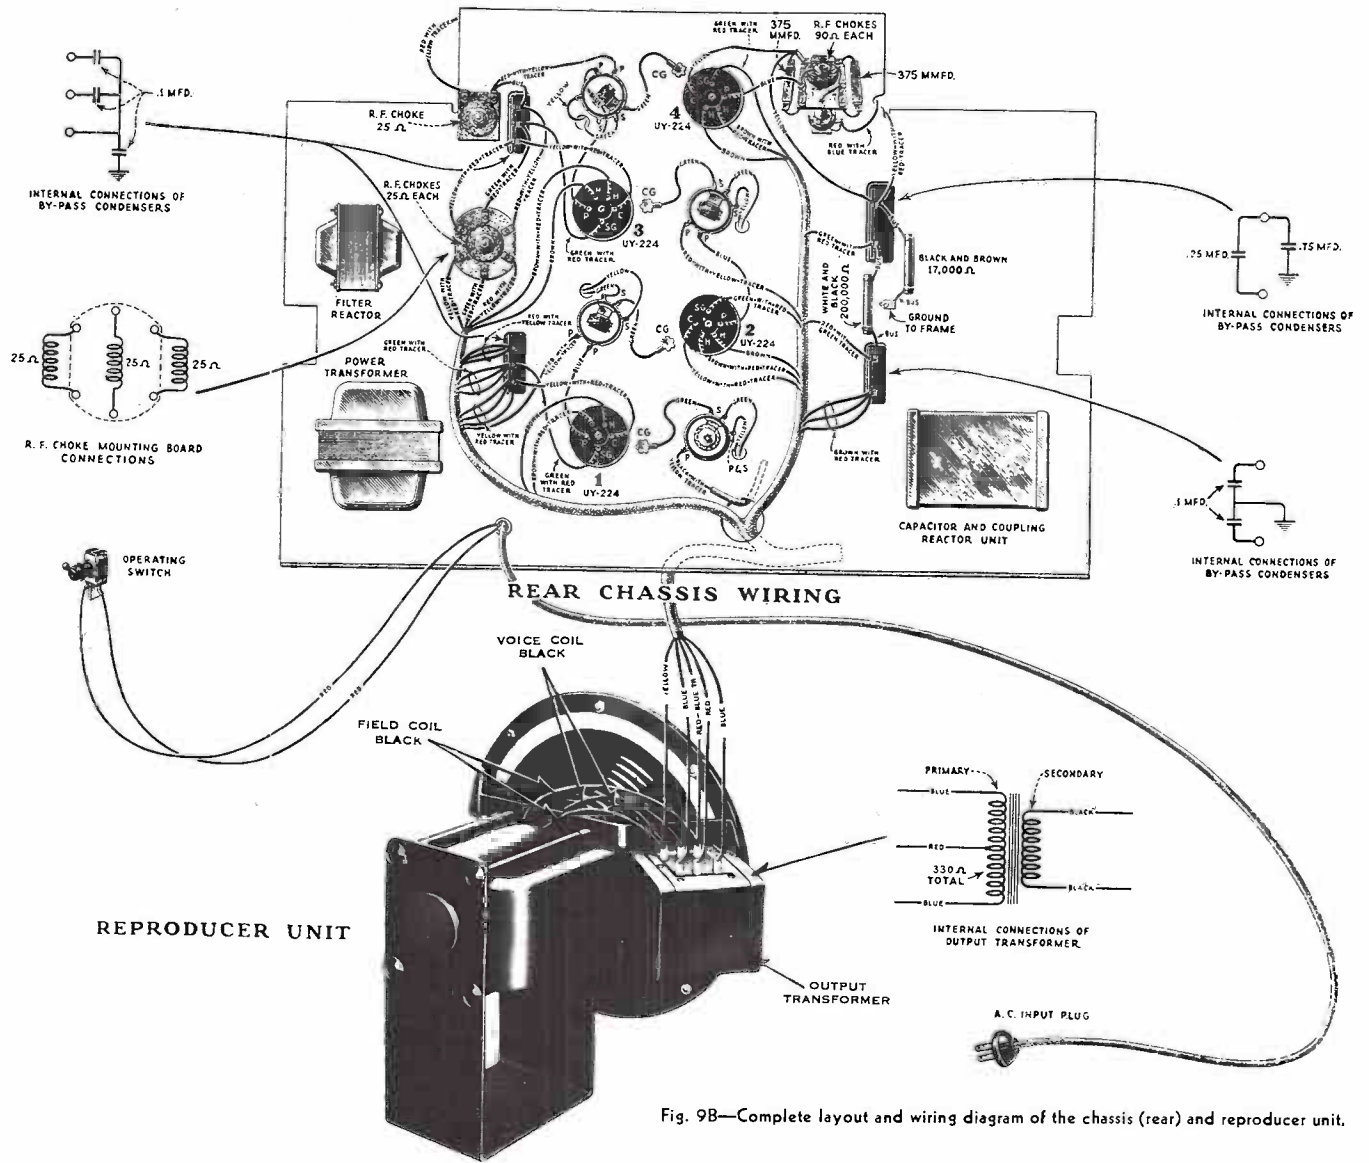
B—Complete layout and wiring diagram of the chassis (rear) and reproducer unit.
